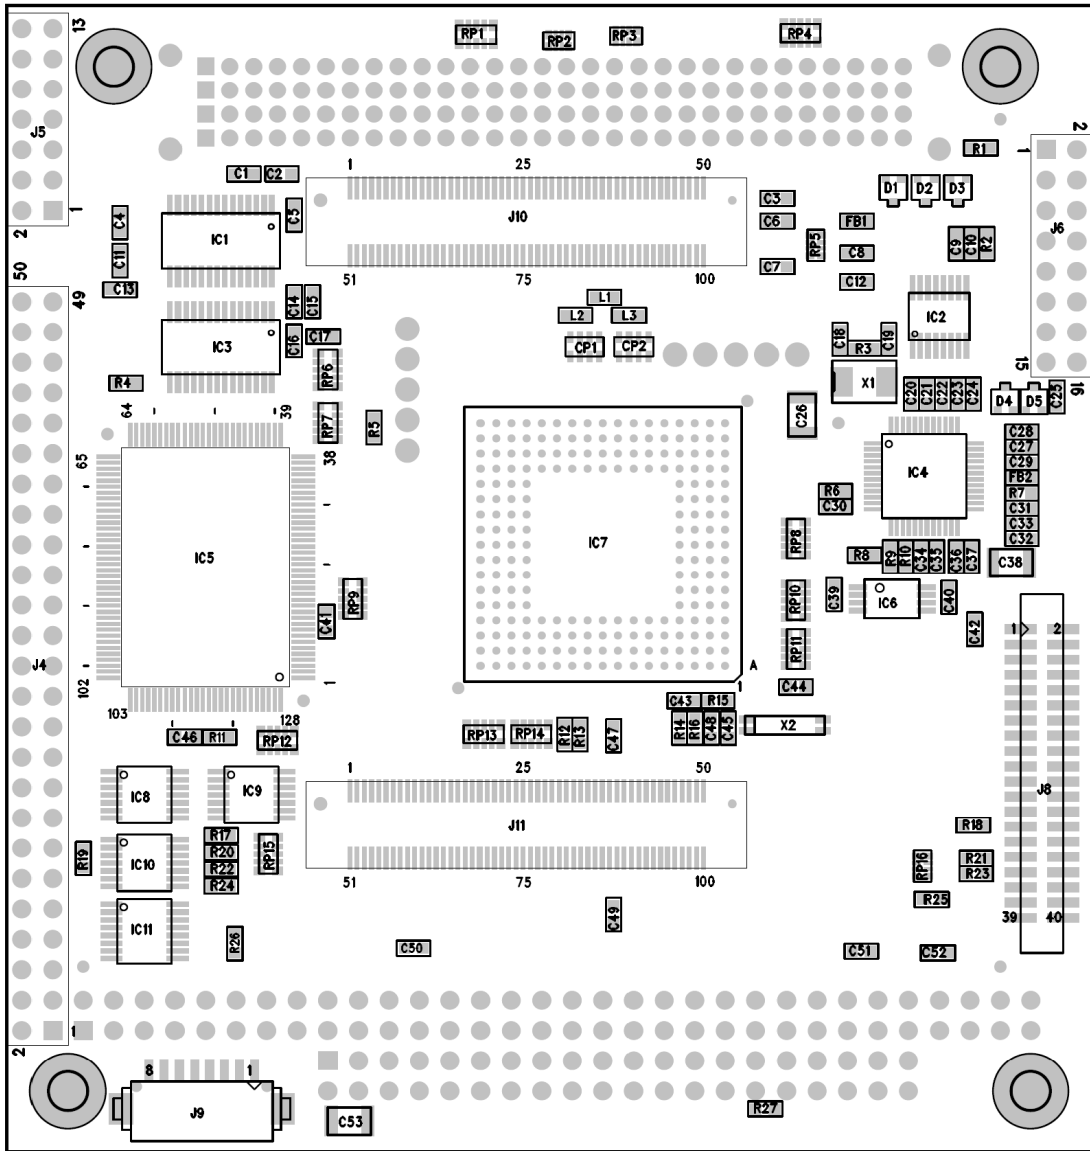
BOTTOM BOARD, TOP SIDE COMPONENT PLACEMENT
